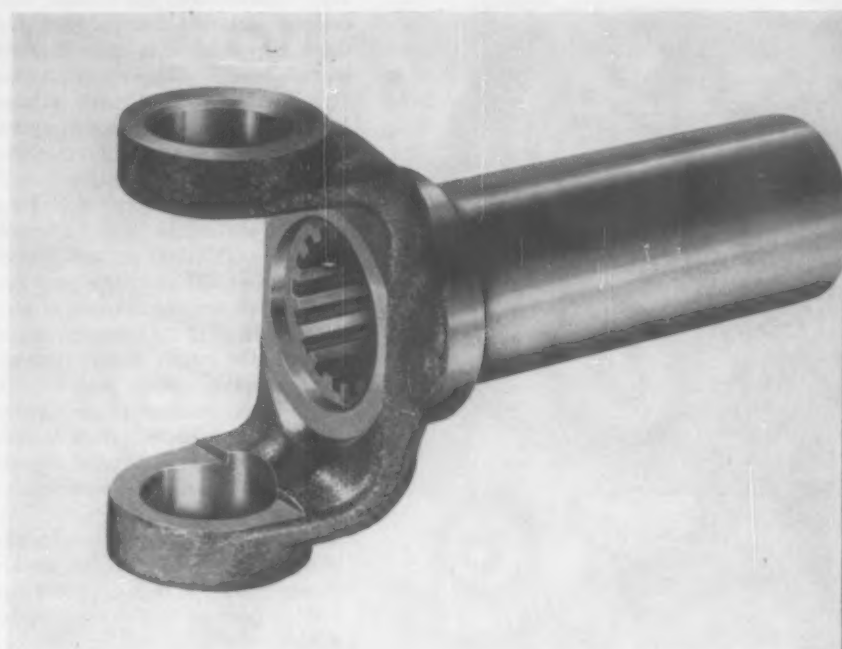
Universal joint yoke of pearlitic malleable cut machining costs.
